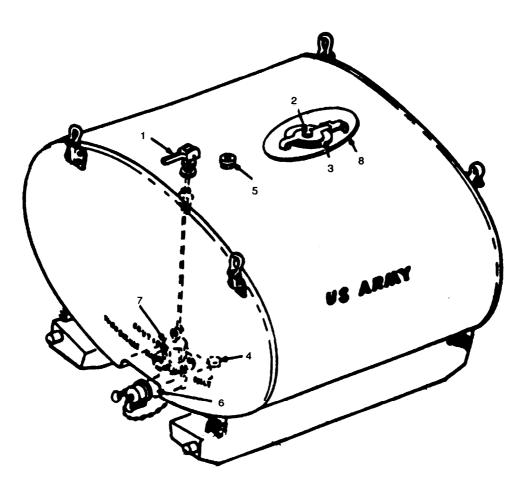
Tank unit assembly (Advane Model TRL 1000).
